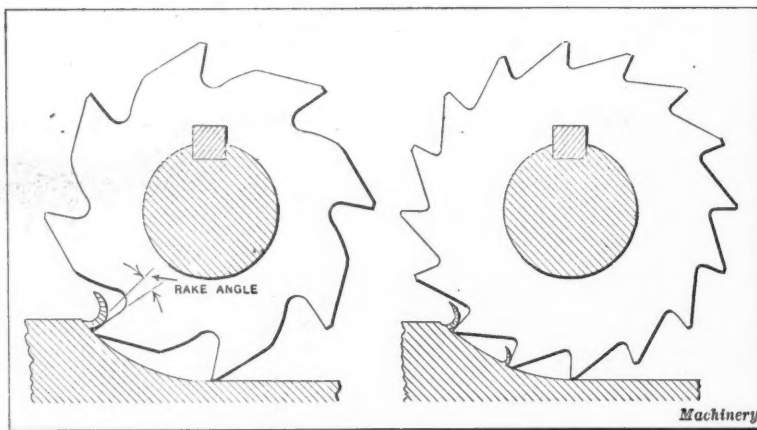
Cutting Action of Milling Cutters of the Hook-tooth and Radial-tooth Types
